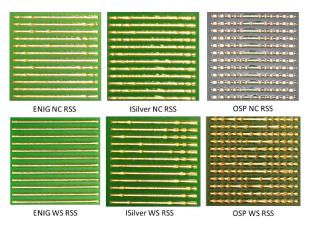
Wetting or Spread Broken Out by Surface Finish and Solder Paste with the RSS Reflow Profile
